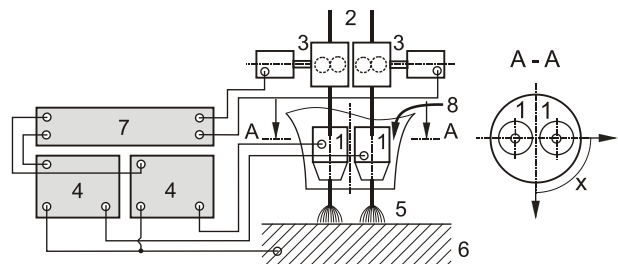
Schematic representation of device for welding with two electrodes and possible directions of welding (x): 1 - contact tubes, 2 - welding wires, 3 - feeding systems, 4 - power sources, 5 - welding arcs, 6 - workpiece, 7 - control unit for feeding the two wires and their supply with pulsed welding current, 8 - supply of shielding gas to gas nozzle, x - possible directions of welding
